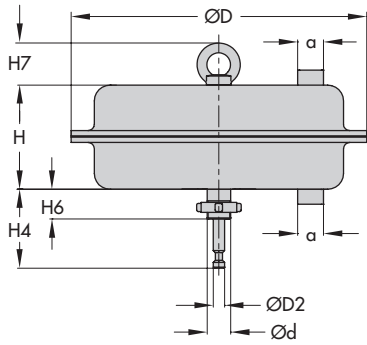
· Type 3271 (700 cm² version with lifting ring)
